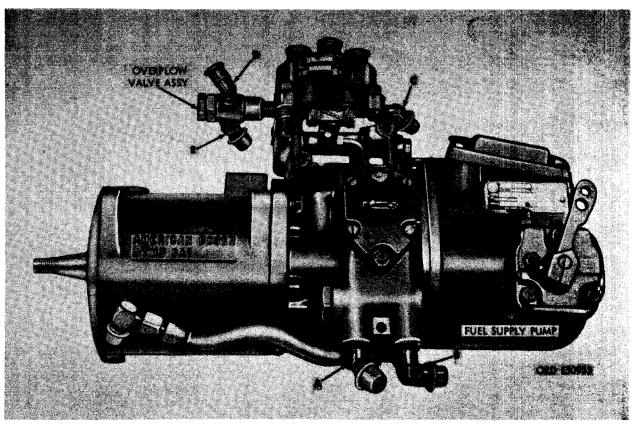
REMOVING OR INSTALLING PUMP FITTINGS (LATE MODEL ENGINES).
